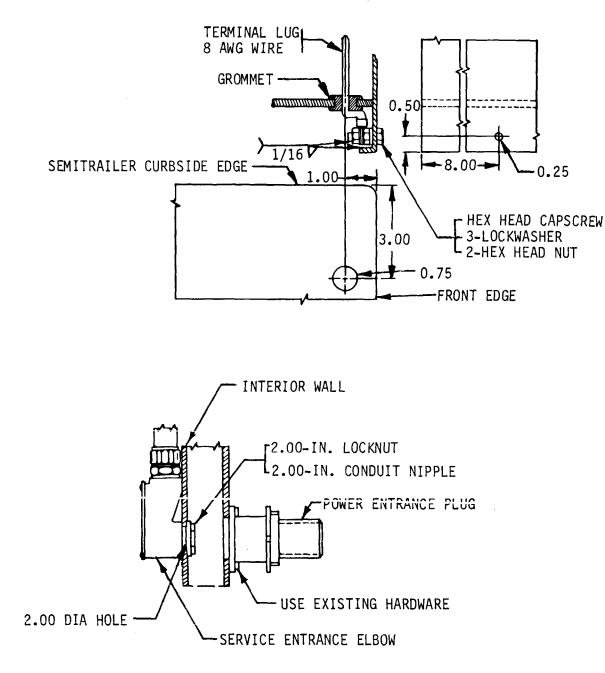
Dimensions for chassis grounding and service entrance elbow.
